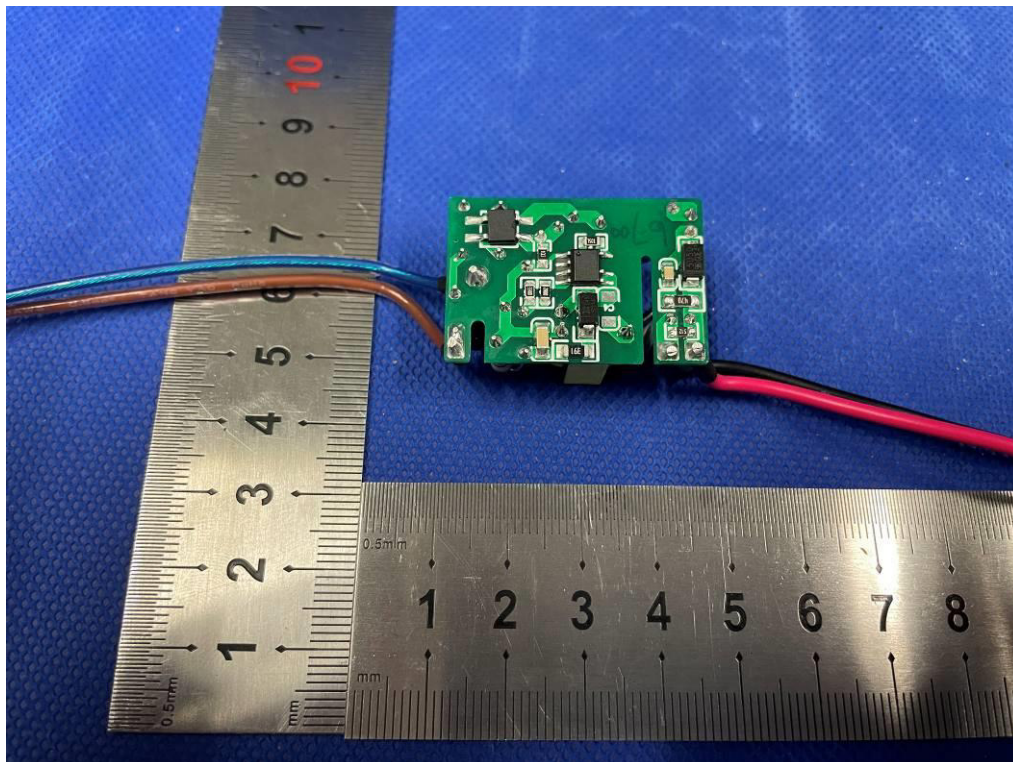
Bottom view of driver PCB for model MINI-6-yyy
